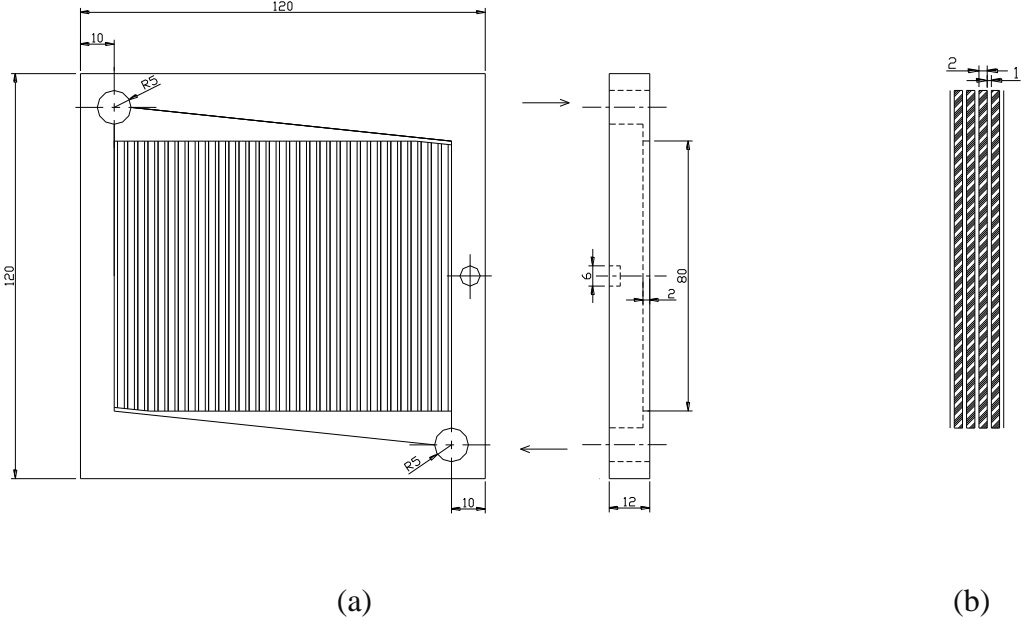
Drawing of the alkaline fuel cell prototype. (a) front and side view of the fuel cell; (b) gas channels. (unit: mm)
